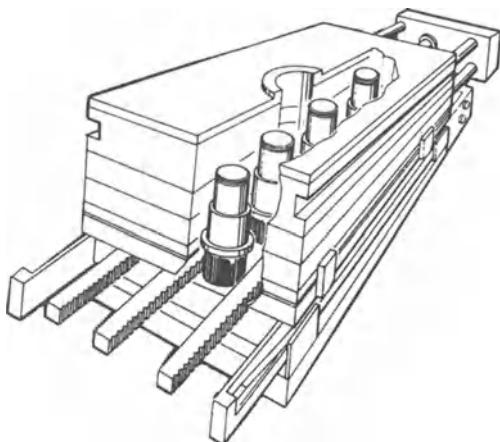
Cores are positioned in rows as seen in this cutaway view of a closed mold frame. Each core resides within a gear that, when engaged by one of the parallel racks, causes the core to rotate and unscrew the molded caps.
